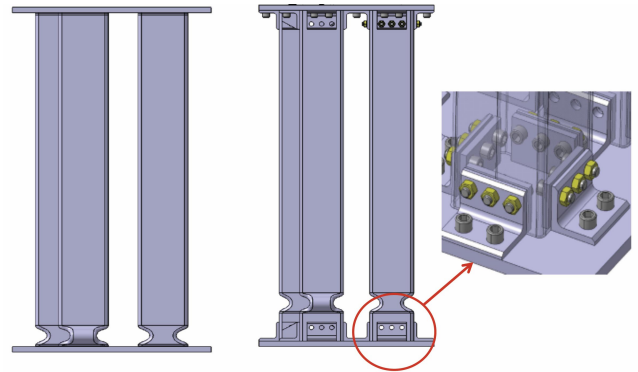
Welded and bolted on tubular energy absorbing system.
